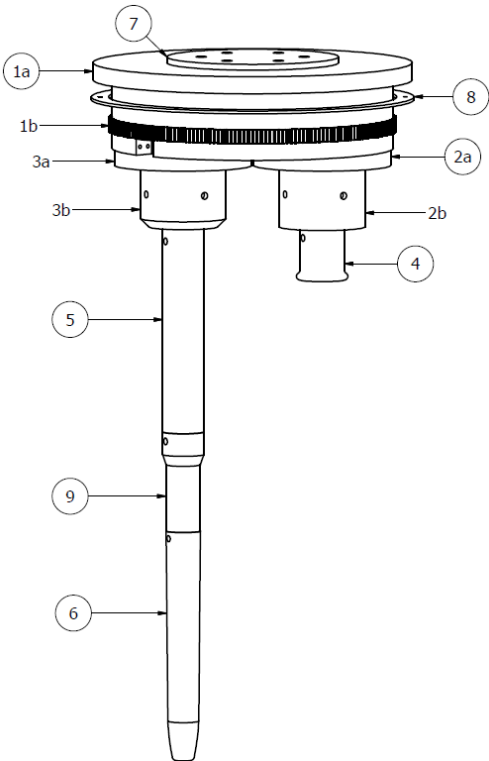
Assembly of Punch and Punch Shuttle and other components
